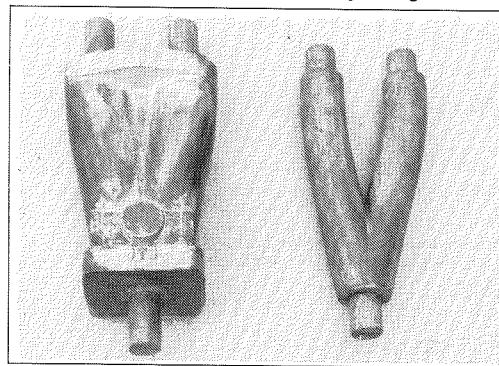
The manifold pattern and 'core pattern' or 'pair of legs' representing the manifold ports. With the core pattern made this was then used to make a 'core mould' in GRP, which could be split in half, figs. 4 & 5. The GRP mould could
